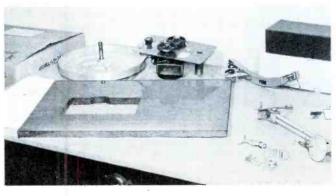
Finished Motor Board Ready for Mounting of Turntable and Arms.
